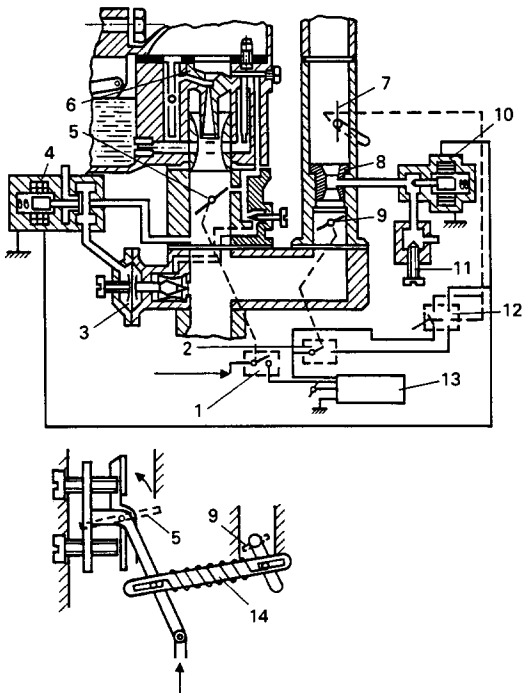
A diagram of a feed system to feed the engine with gasoline-hydrogen fuel: 1, 2, 12 = contacts; 3 = air chamber; 4 and 10 = electromagnetic valves; 5 and 9 = throttle valves; 6 = carburetor; 7 = air valve; 8 = supplementary diffusor; 11 = adjusting screw; 13 = electronic unit; 14 = elastic unit.
